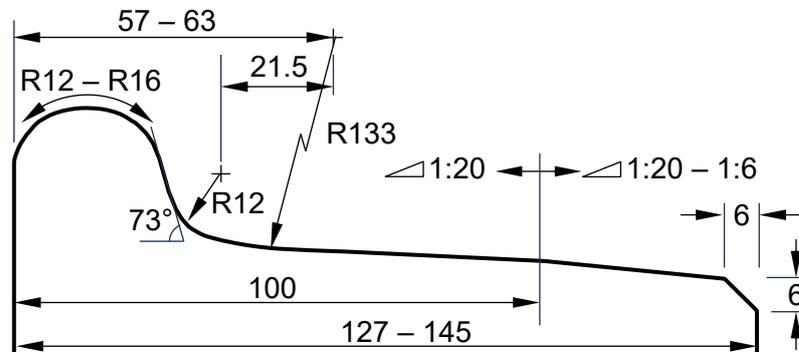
KiwiRail Standard Wheel Profile Dimensions
